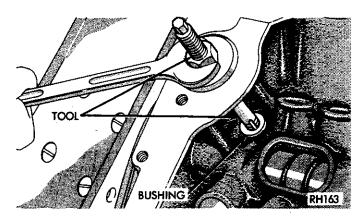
Removing Distributor Drive Shaft Bushing with Tool C-3052
